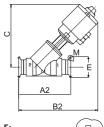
Dimensional drawing of DETAILS M FMPAV- Sanitary clamp ends ISO:2852
